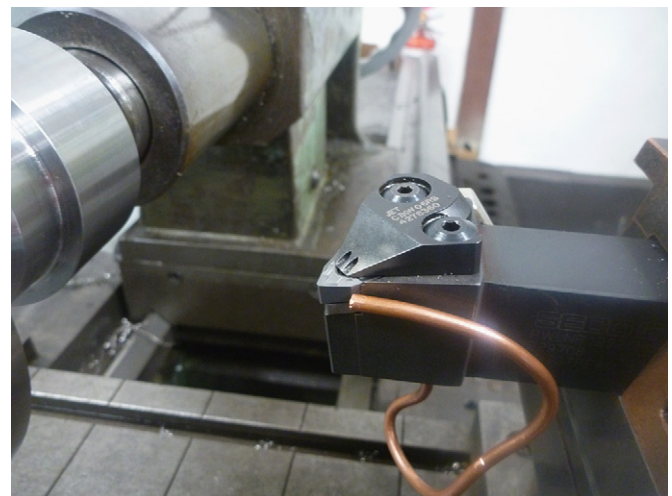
Photograph of tool holder and coolant delivery nozzles.
